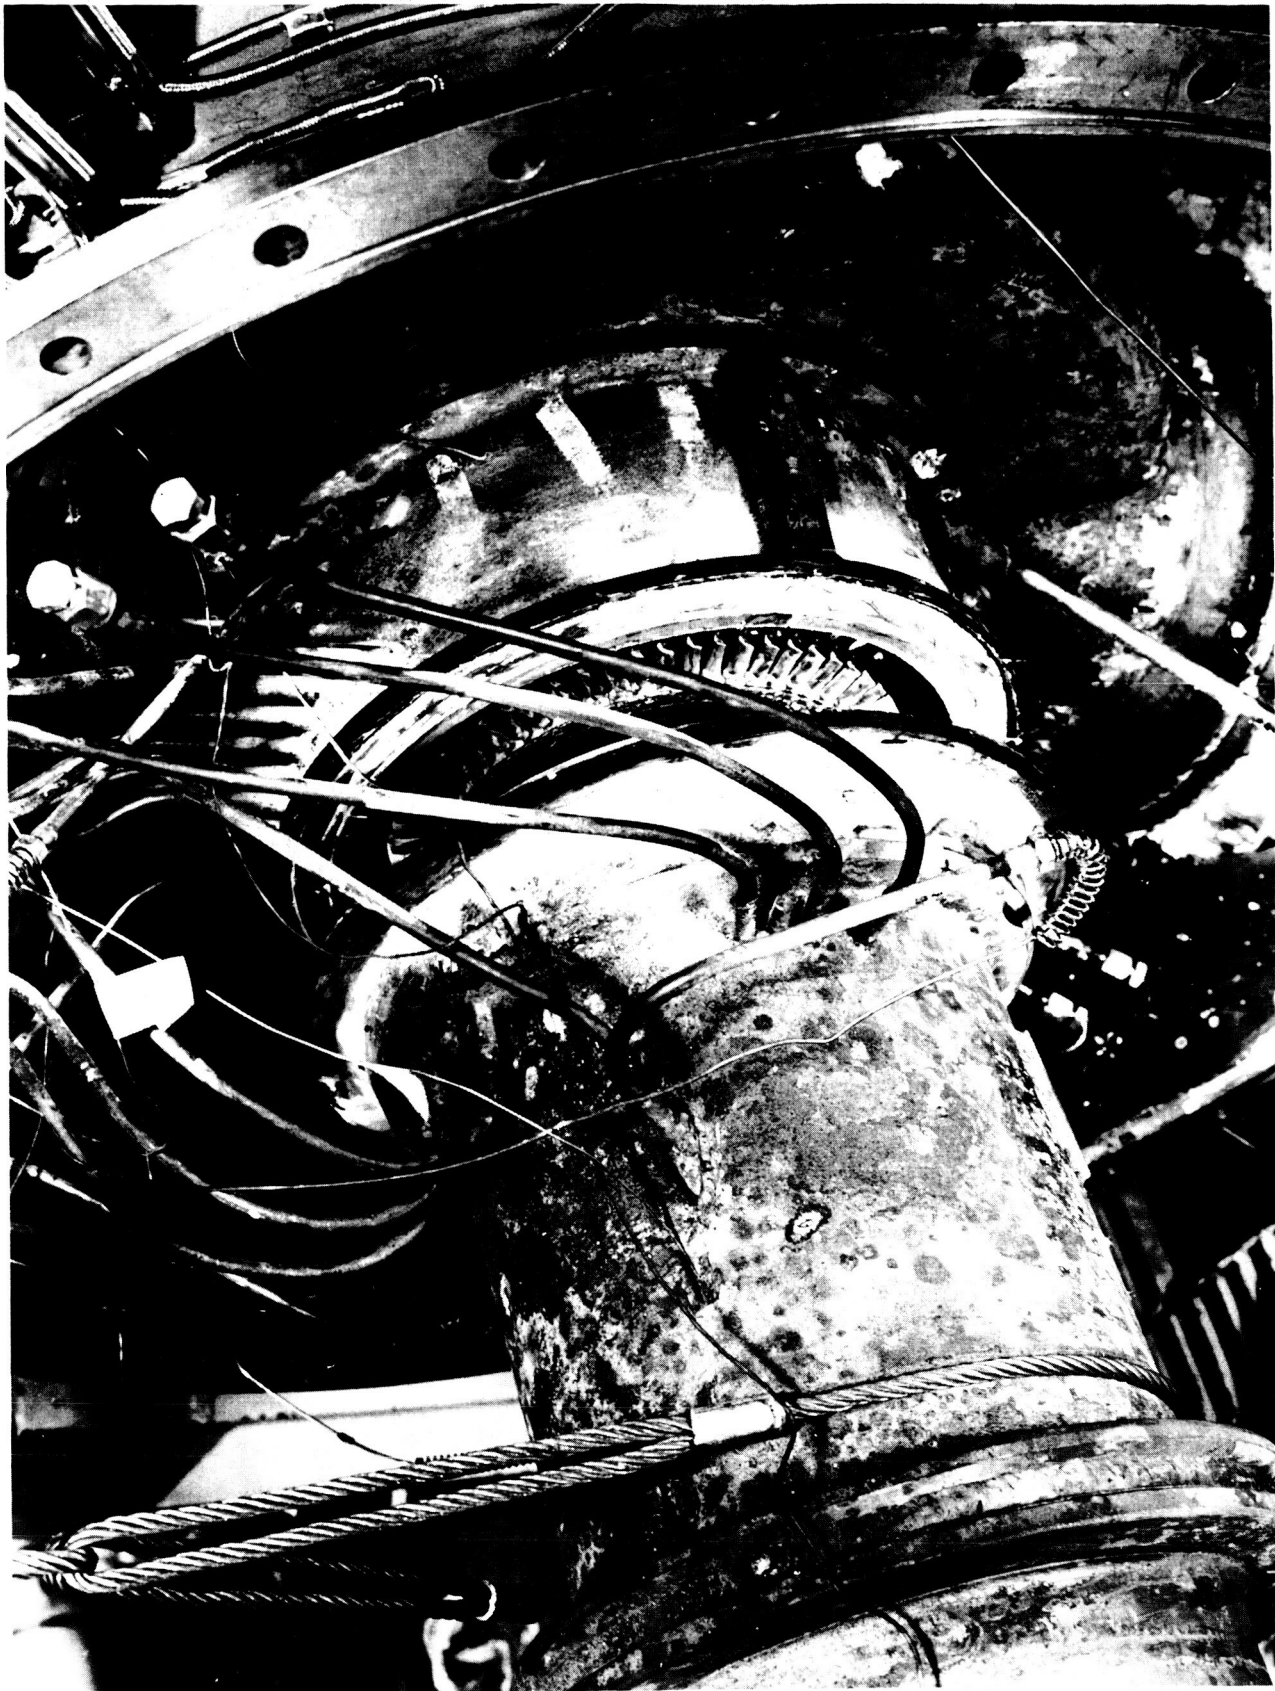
Turbine Following Opening of Forward Flange for Inspection.
